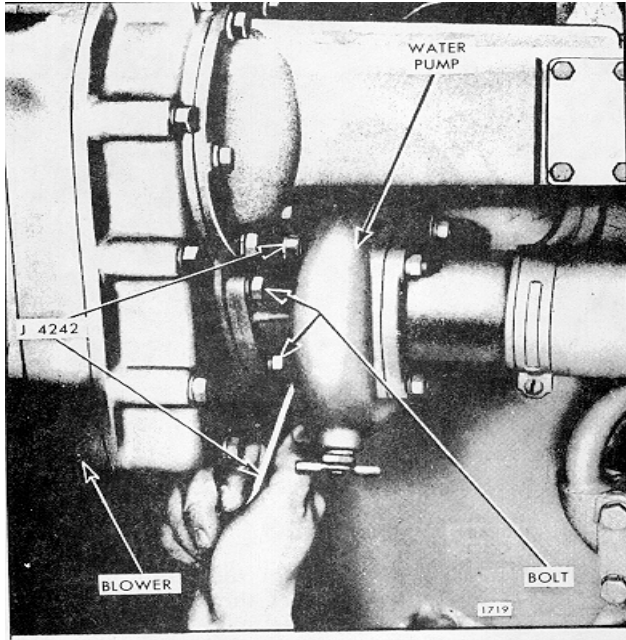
Loosening Inner Water Pump-to-Blower Attaching Bolt with Tool J 4242
